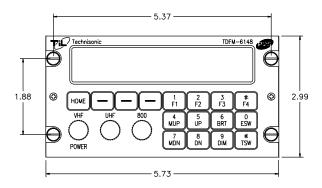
Outline Drawing for Model TDFM-600/6000
